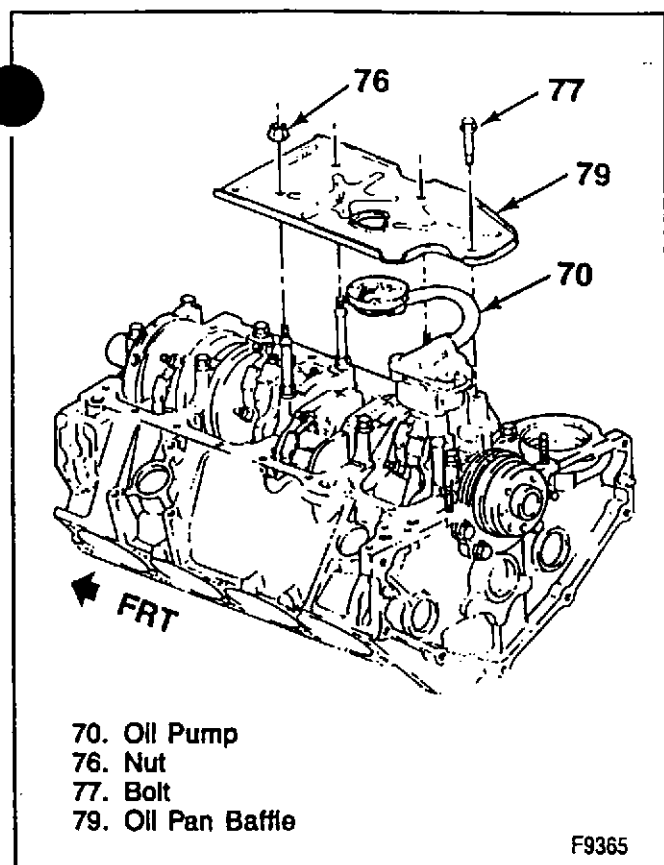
Oil Pan Deflector (5.0L and 5.7L Engines)
